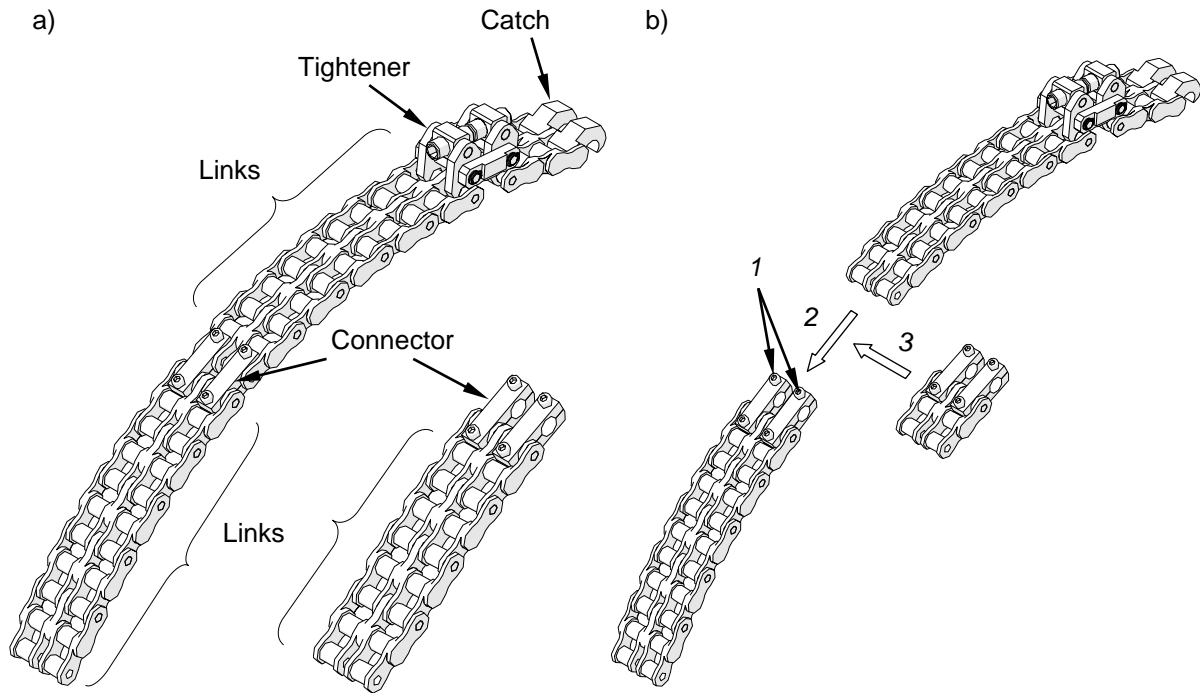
View of the basic and the 9-link segment (a); assembling the chain for a pipe with the outer diameter of 223–251 mm (b)
